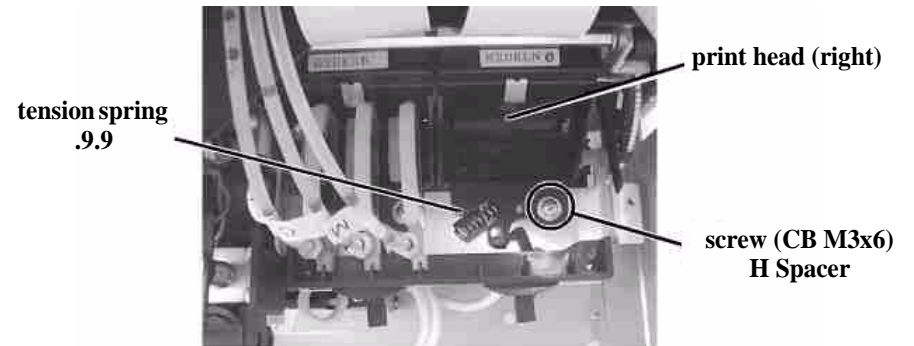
Printhead Tension Spring and Screw Removal 1/2
